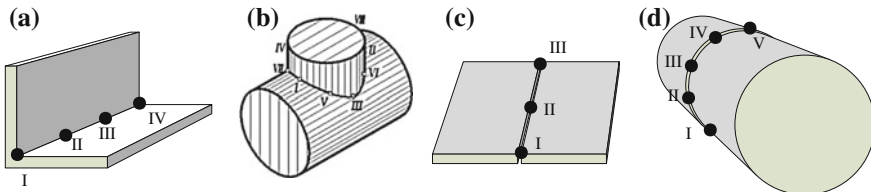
Different connection types for arc welding as: a right angle; b tubular; c plate; d arc
